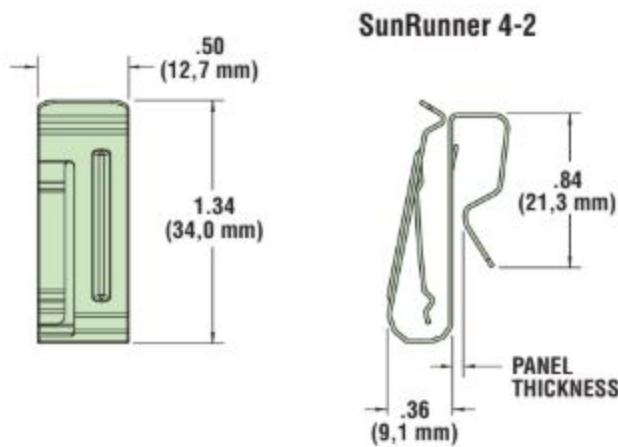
Heyco SunRunner 4-2 Technical Drawing.
